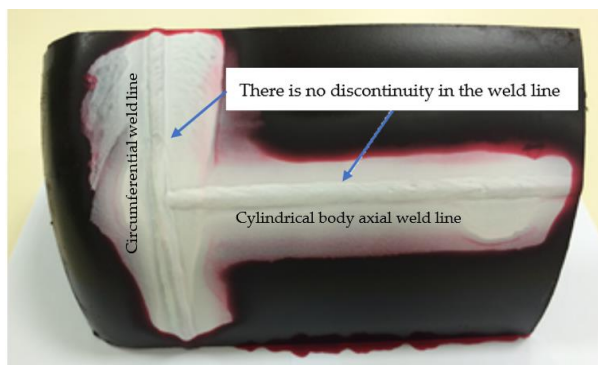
Welding zone sample to measure the discontinuities using penetrant liquid.
